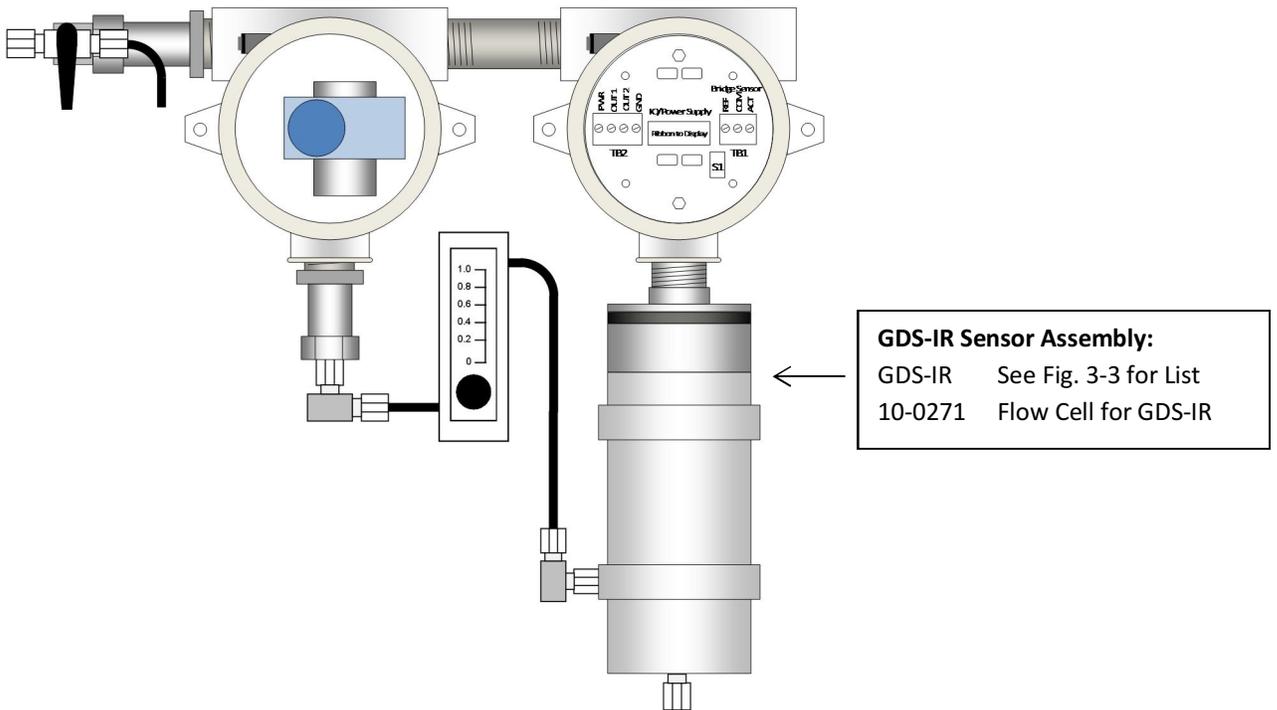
GDS-58XP Assembly with GDS-IR (Spare Parts)
